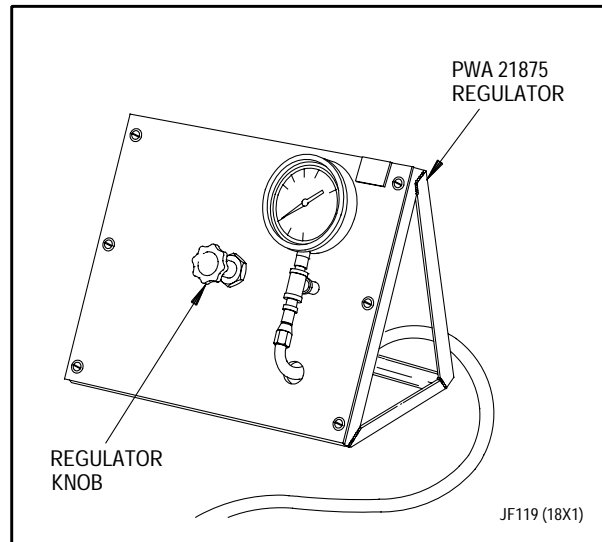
No. 1 Bearing Seal Assembly - Air Leak Check (Sheet 4 of 5)
